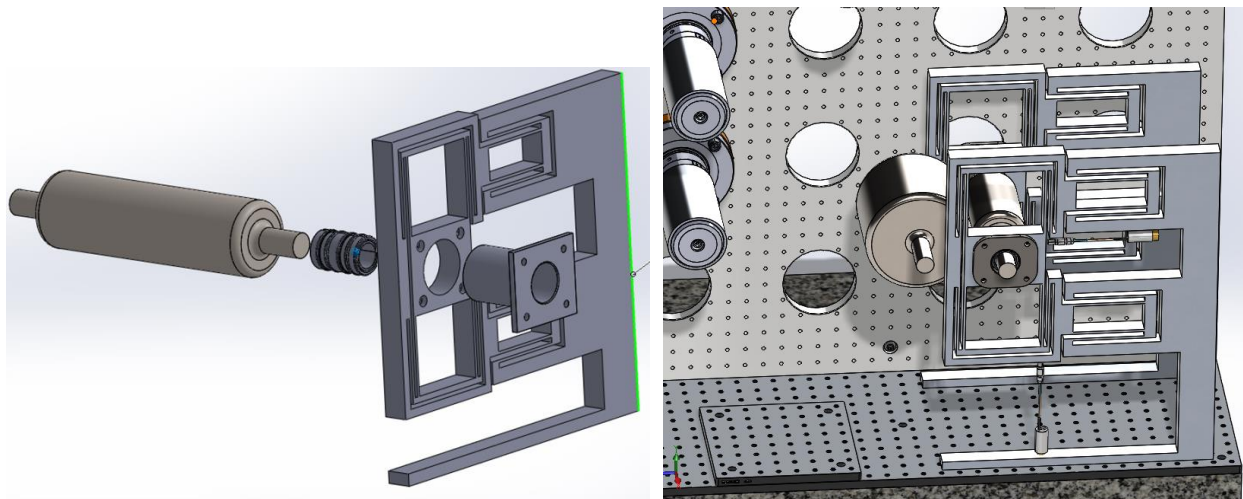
An early design concept for the flexure positioning stage, showing the print roller and air bearing connection.
